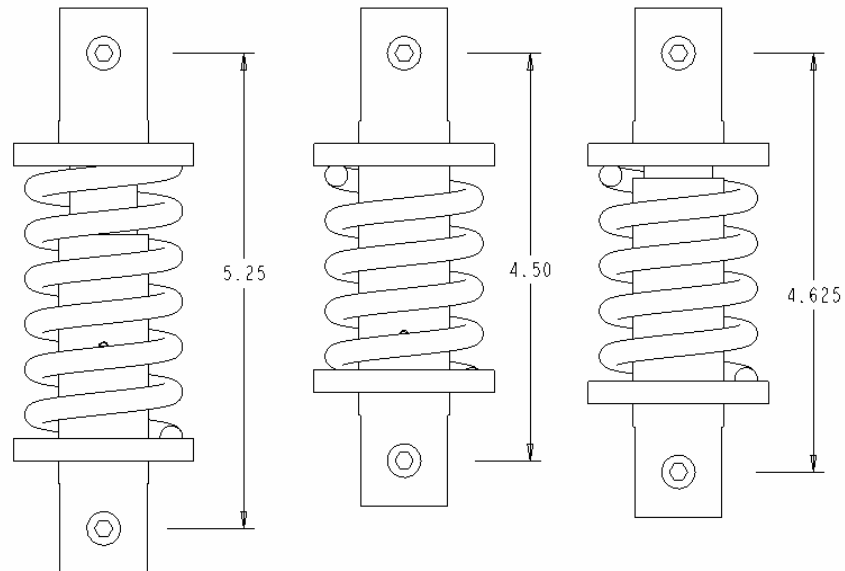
Spring-Loaded Link in the Unlocked, Center, and Locked Positions
